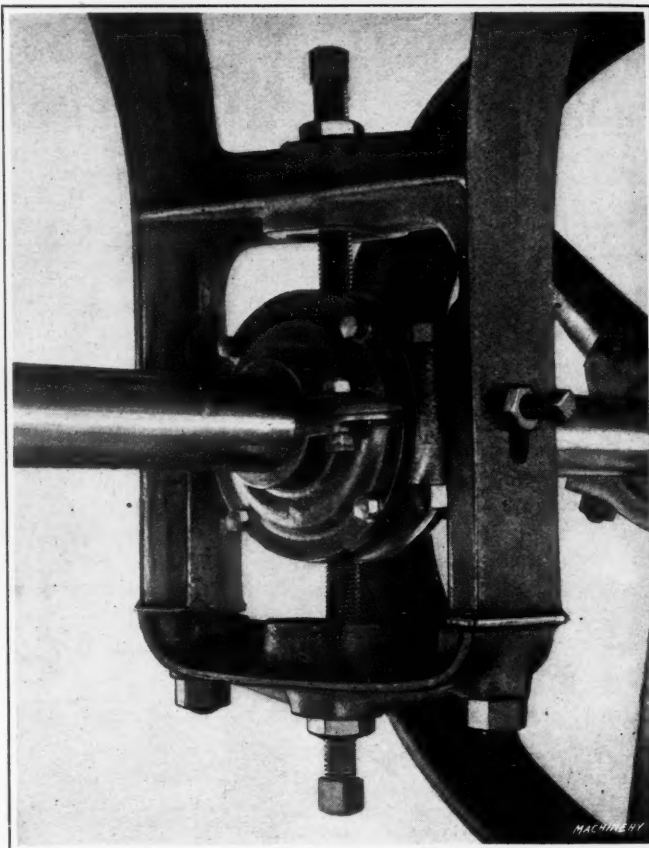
Robson & Sorensen Two-part Ball Bearing mounted in SKF Hanger
